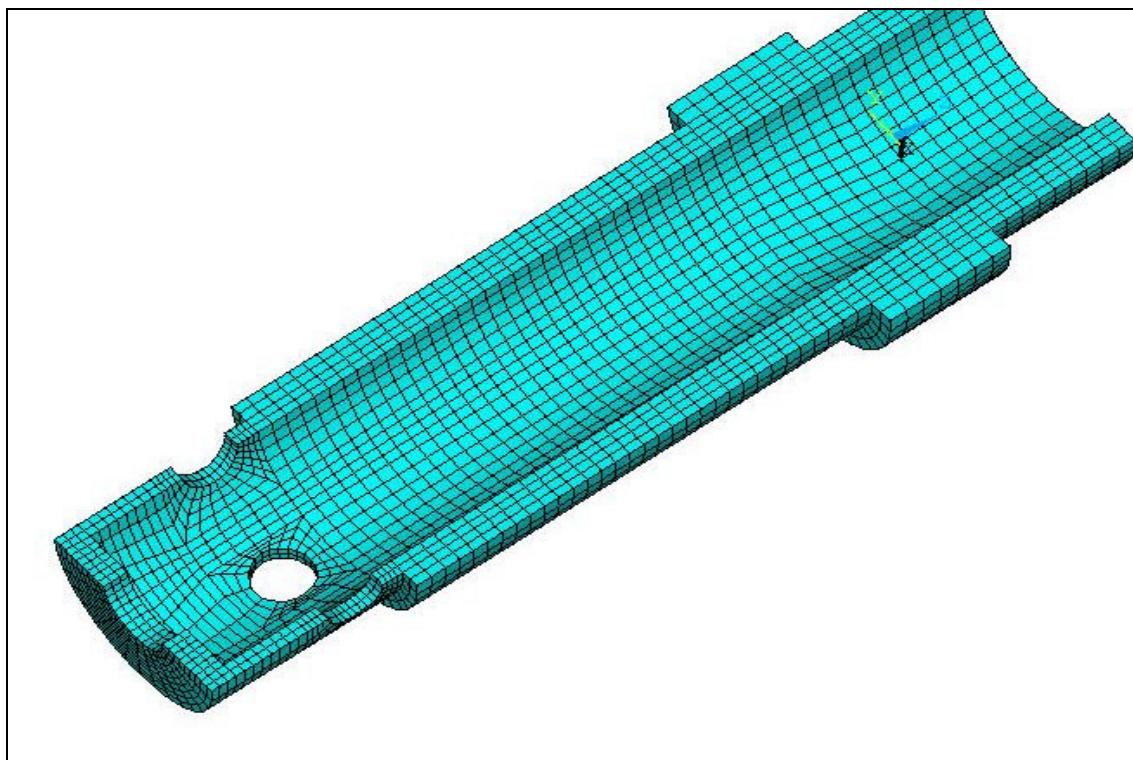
Meshing short collet body of the welding torch model in Ansys.
